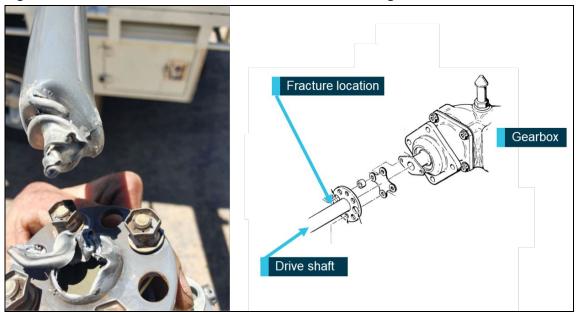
Tail rotor drive shaft fracture and schematic of the general area of the fracture
